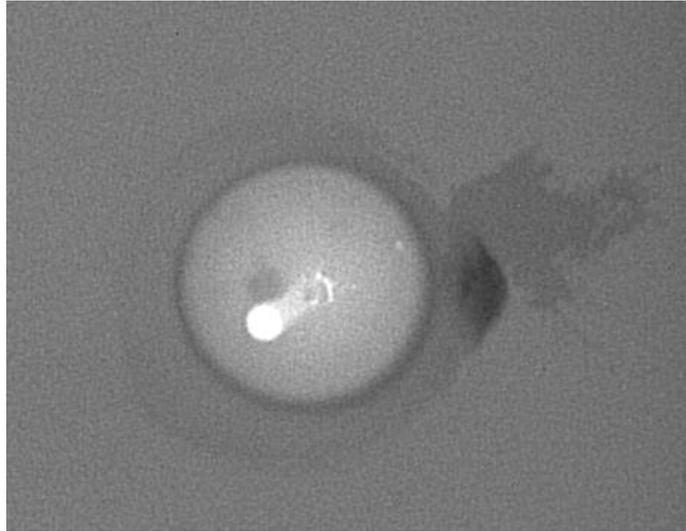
Spot weld sample Plate 2, weld (a).
